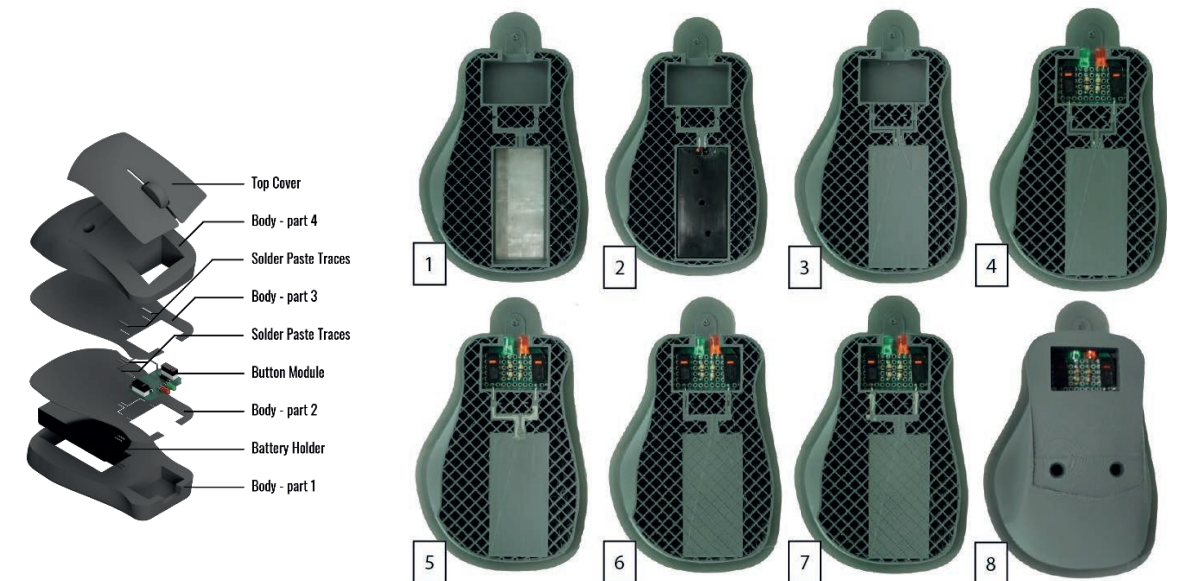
Exploded view of the dummy computer mouse used as demonstrator.
